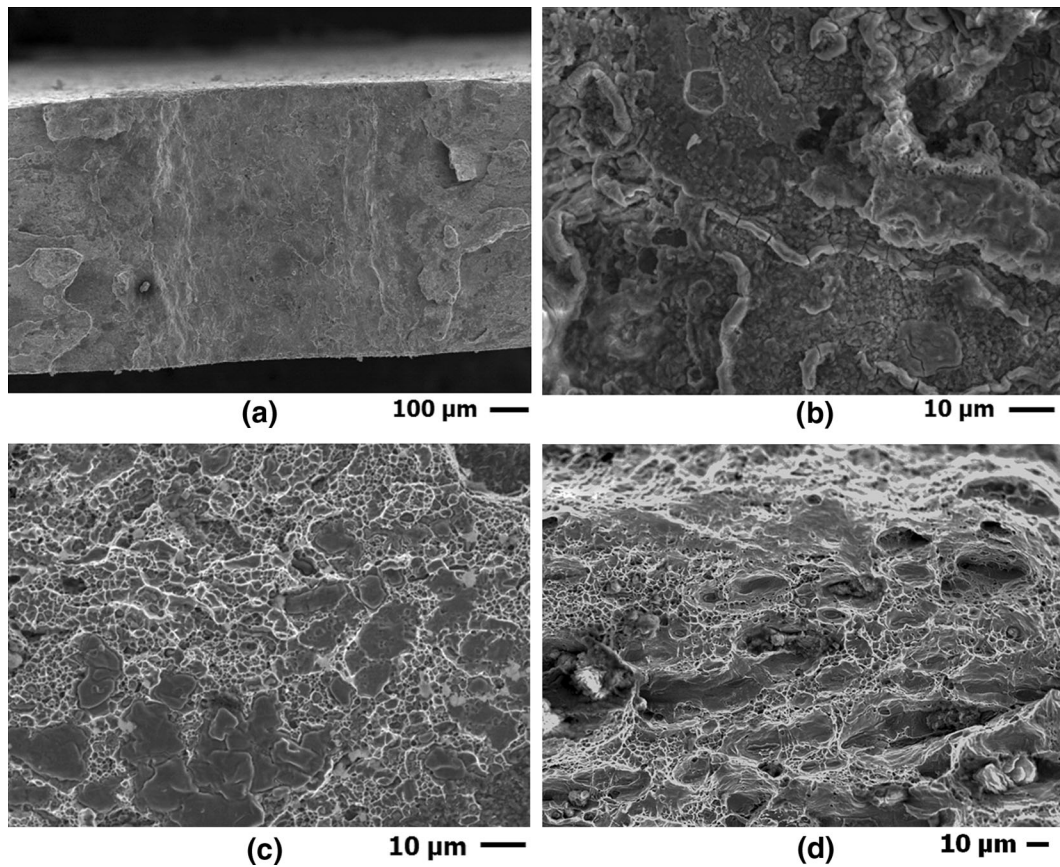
(a) Fracture surface after a tensile test of a 30 pct rolled 4-mm pore sample: (b) unclosed region: (c) locally welded region: (d) tensile test on sample without pore.
